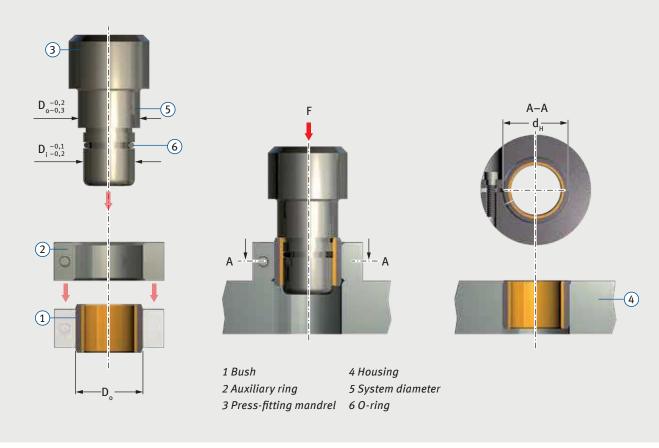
Press-fitting bushes, $D_o \ge 55 \text{ mm}$, with auxiliary ring
